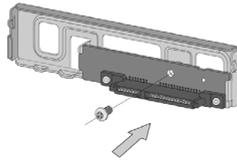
Fastening Interposer Board into Mounting Bracket
